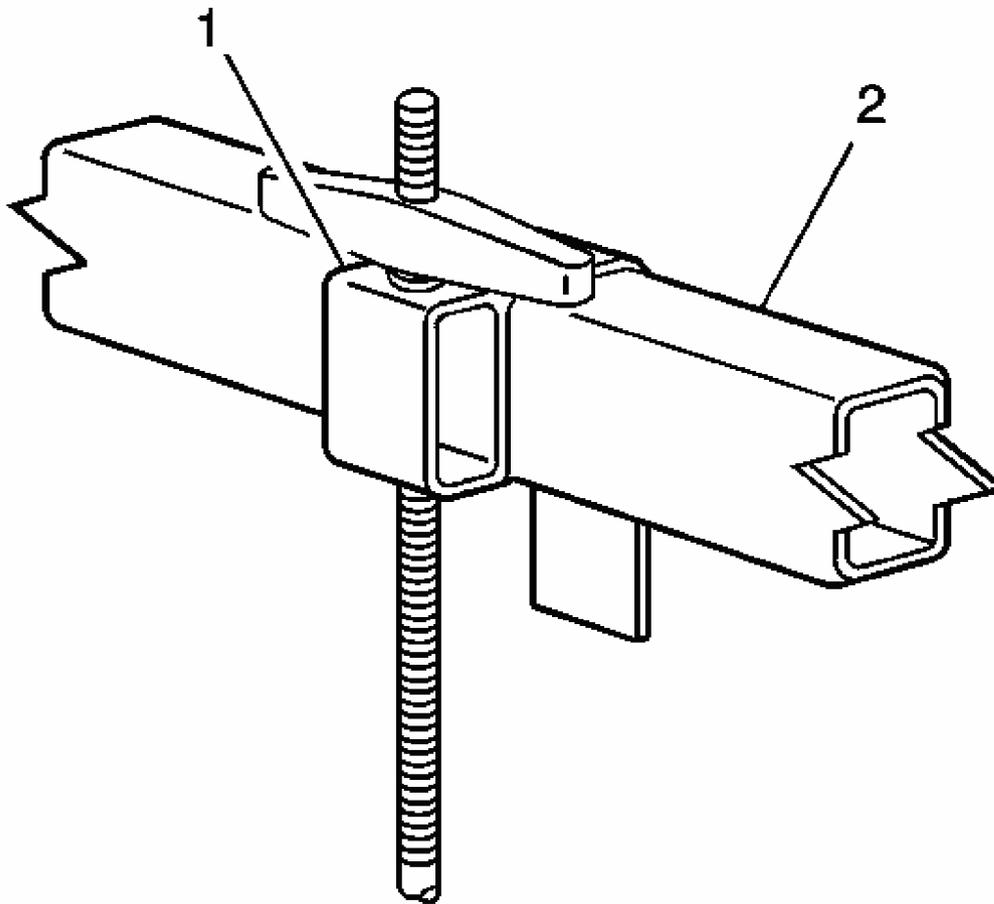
View Of Lift Hook & Bracket Assembly At Longitudinal Mounted Cross Bar
